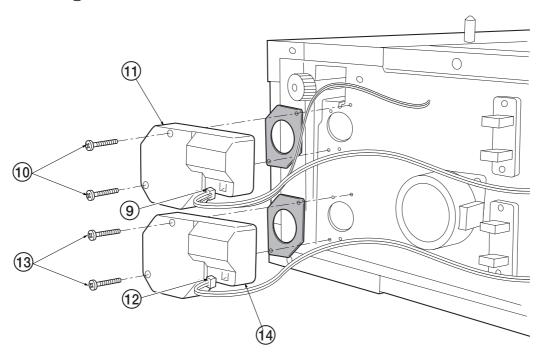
Removing the upper and lower cassette base elevation motors
